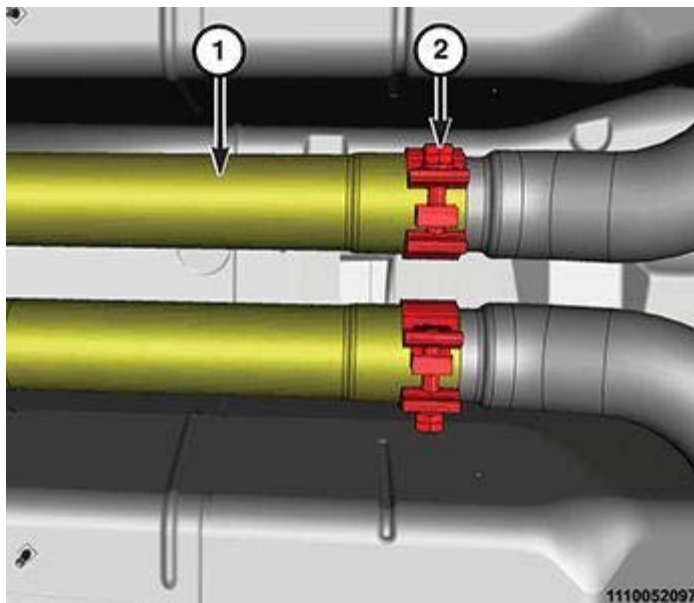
Exhaust Pipe/Muffler, Resonator Assembly & Front Exhaust Pipe Band Clamps
